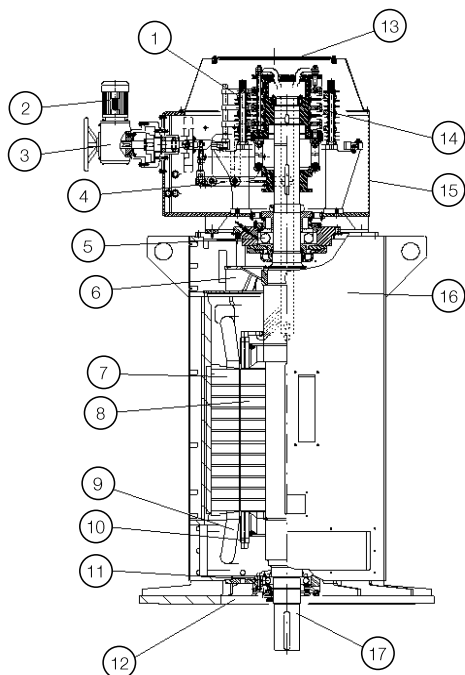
Typical vertical motor with solid shaft and motorized brush holder
